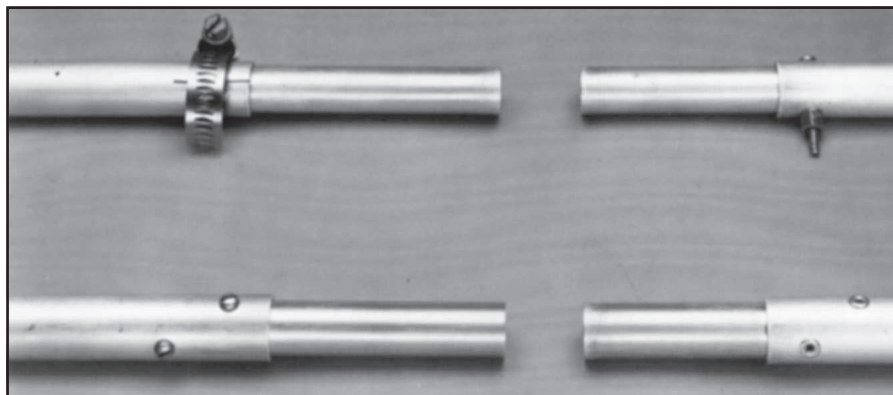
Some methods of connecting telescoping tubing sections to build beam elements. See text for a discussion of each method.
